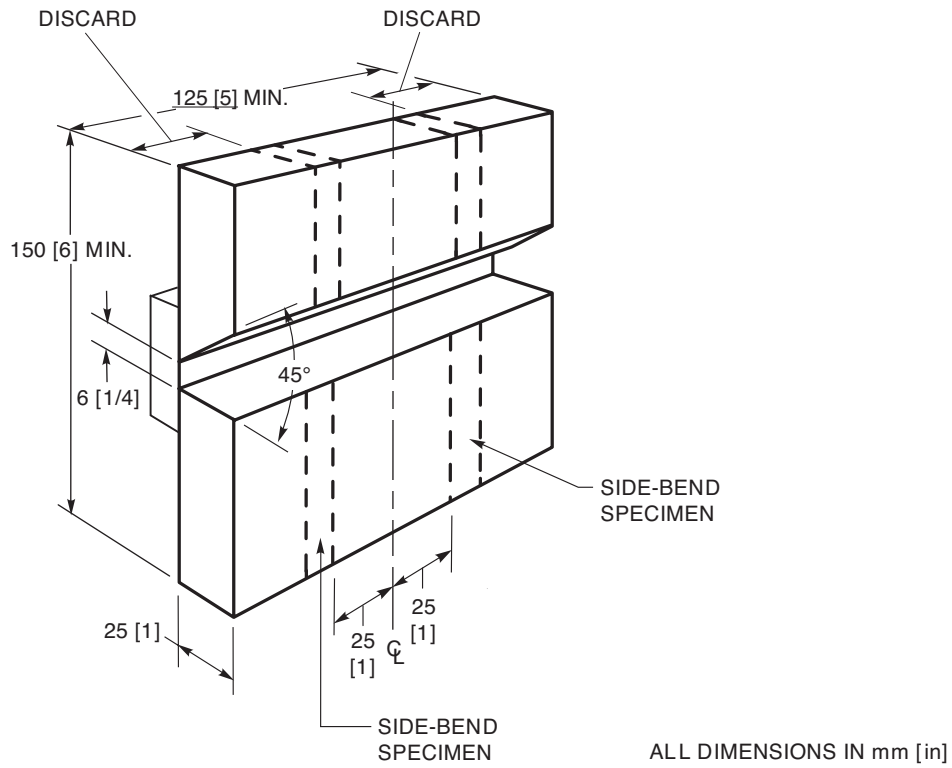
Optional Test Plate for Unlimited Thickness—Horizontal Position—Welder Qualification (see 7.23.1.2)
